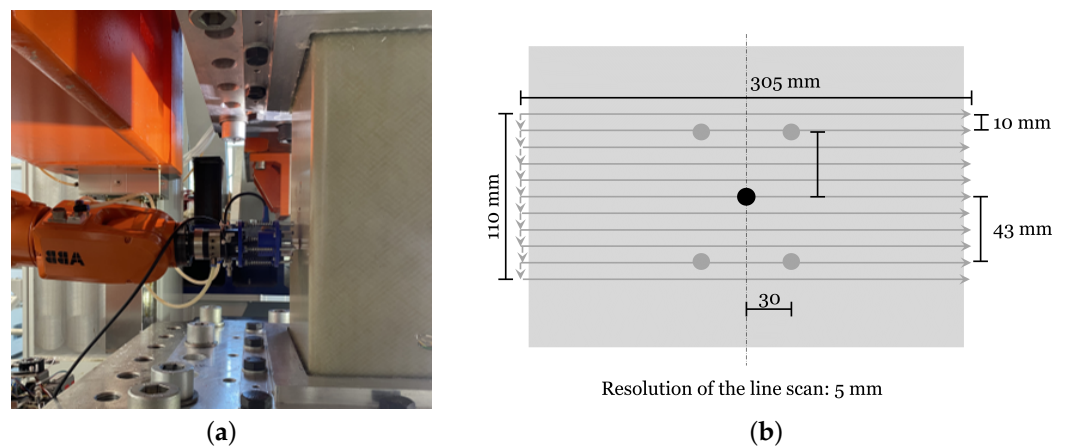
Automated non-destructive inspection of the composite box structure using a robotic system. (a) Robotic arm with the shear wave ultrasonic probe inspecting the composite box structure. (b) Measurement positions for shear wave (grey), Lamb wave (black), and air-coupled ultrasonic testing (arrows).
